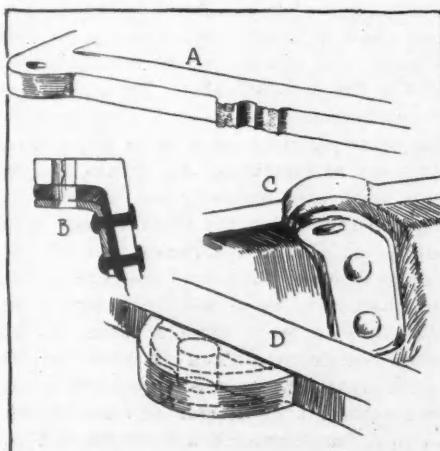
BROKEN CRANKCASE AND TWO METHODS OF REPAIRING IT
